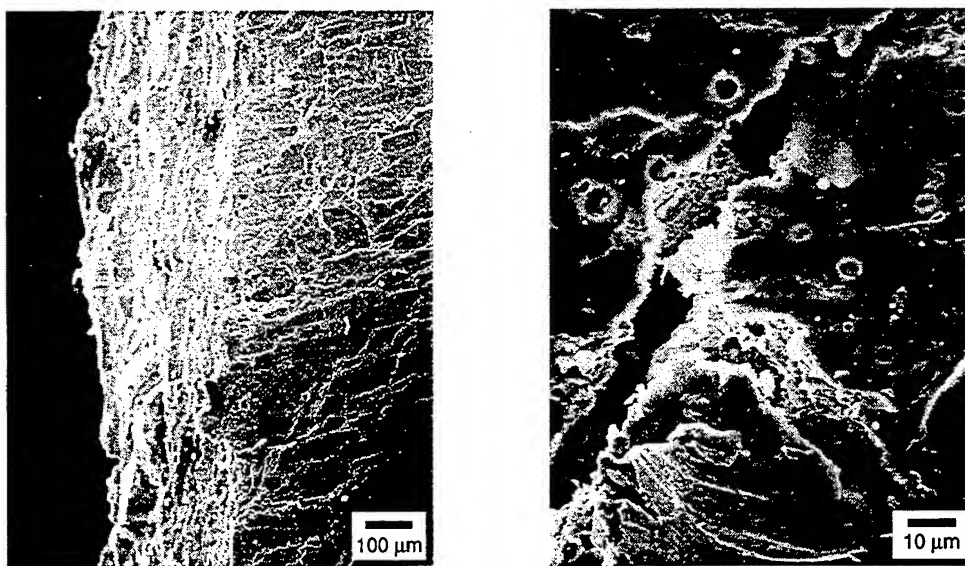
Scanning electron micrographs of the fracture surfaces of molybdenum rail.
